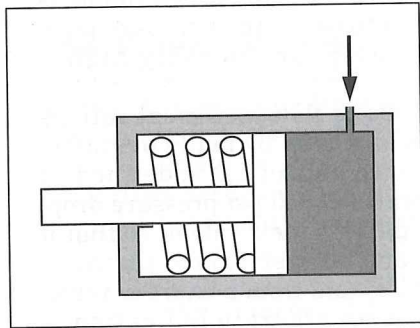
Spring force retracts the rod in a spring-return cylinder.
